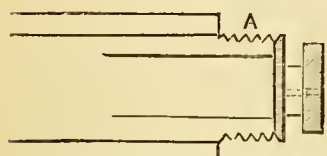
ENLARGED VIEW OF VALVE AT END OF ELBOW JOINT (D in Fig. 1). A, Screw Thread.
